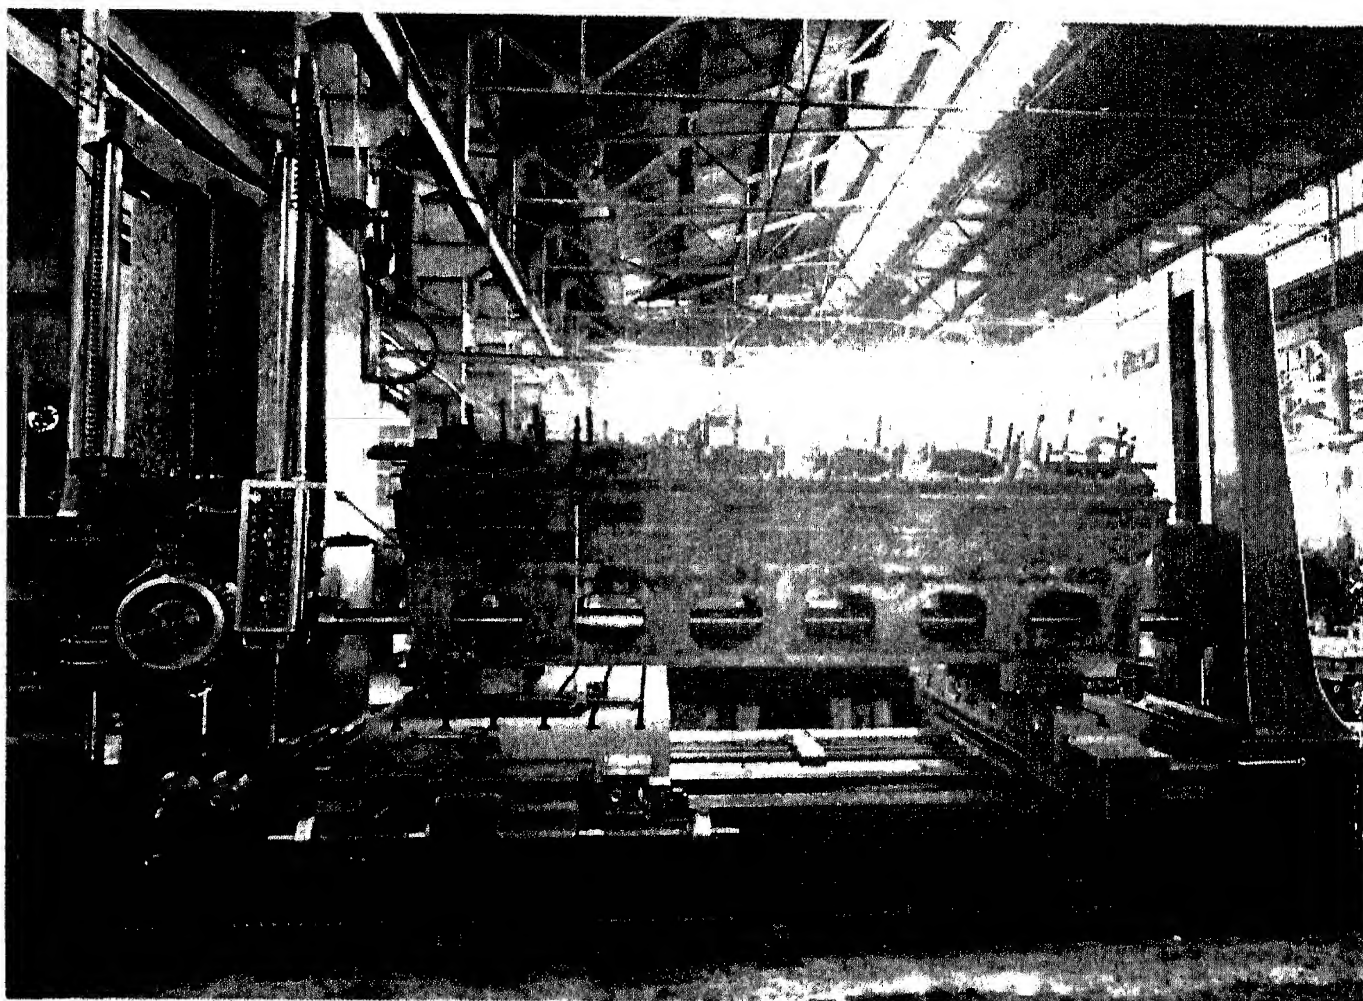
A 6 in. table-type horizontal boring, drilling, and milling machine with an auxiliary saddle and table. A boring bar is arranged between the spindle and backrest block for boring the bearings in a large cylinder block. (Courtesy Lucas Machine Div., The New Britain Machine Co.)
